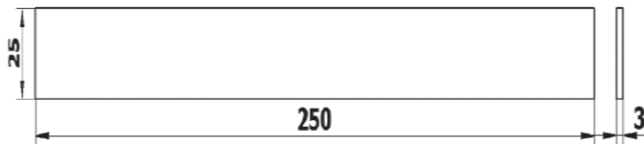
Diagram of tensile specimen. All dimensions are in mm
